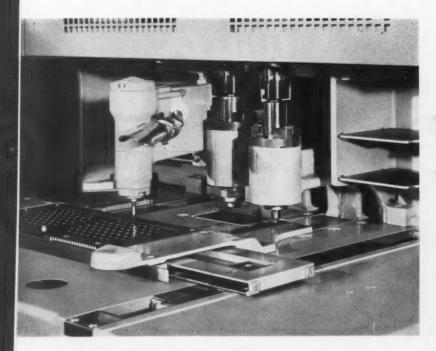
Drill bushings in cardboard-template holder (lower left) receive pilot-pin when it is lowered through punched holes in template by a hydraulic cylinder.
